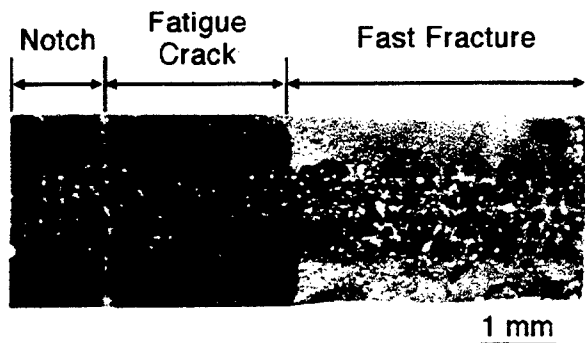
Surface of specimen that was fatigued, heat tinted, and fractured.
